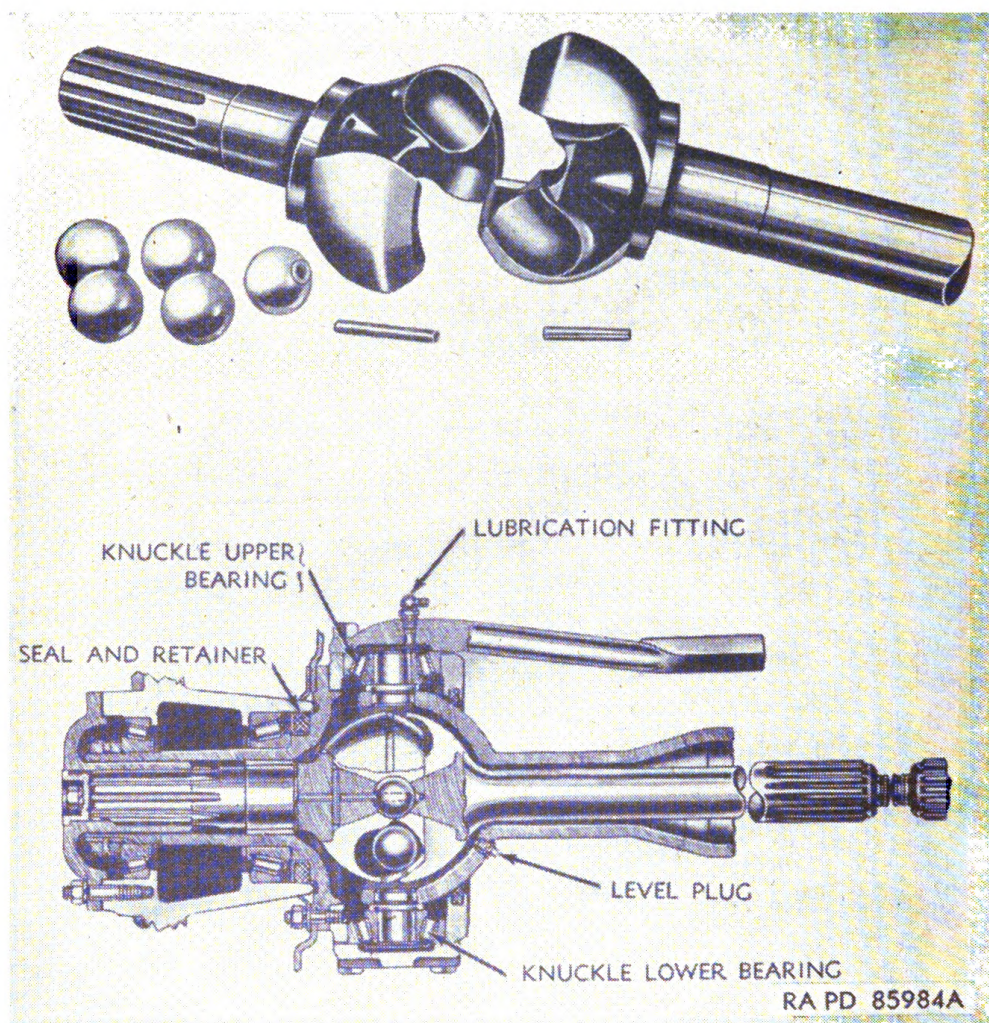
Universal joint for a front wheel drive (Bendix-Weiss).
